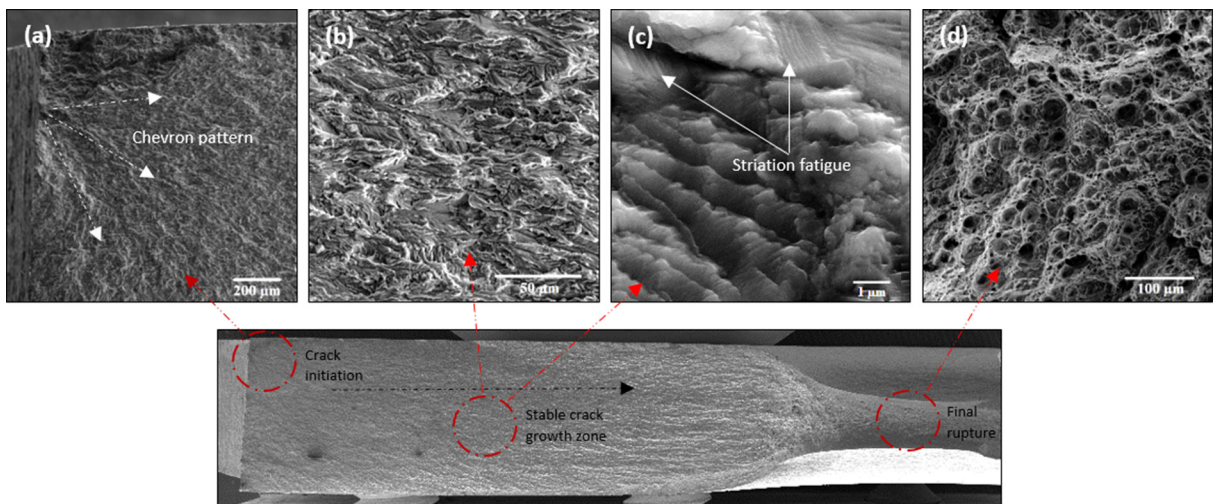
Fracture surface of specimen with LSP: (a) crack initiation, (b) crack growth, (c) fatigue striation and (d) final rupture.
